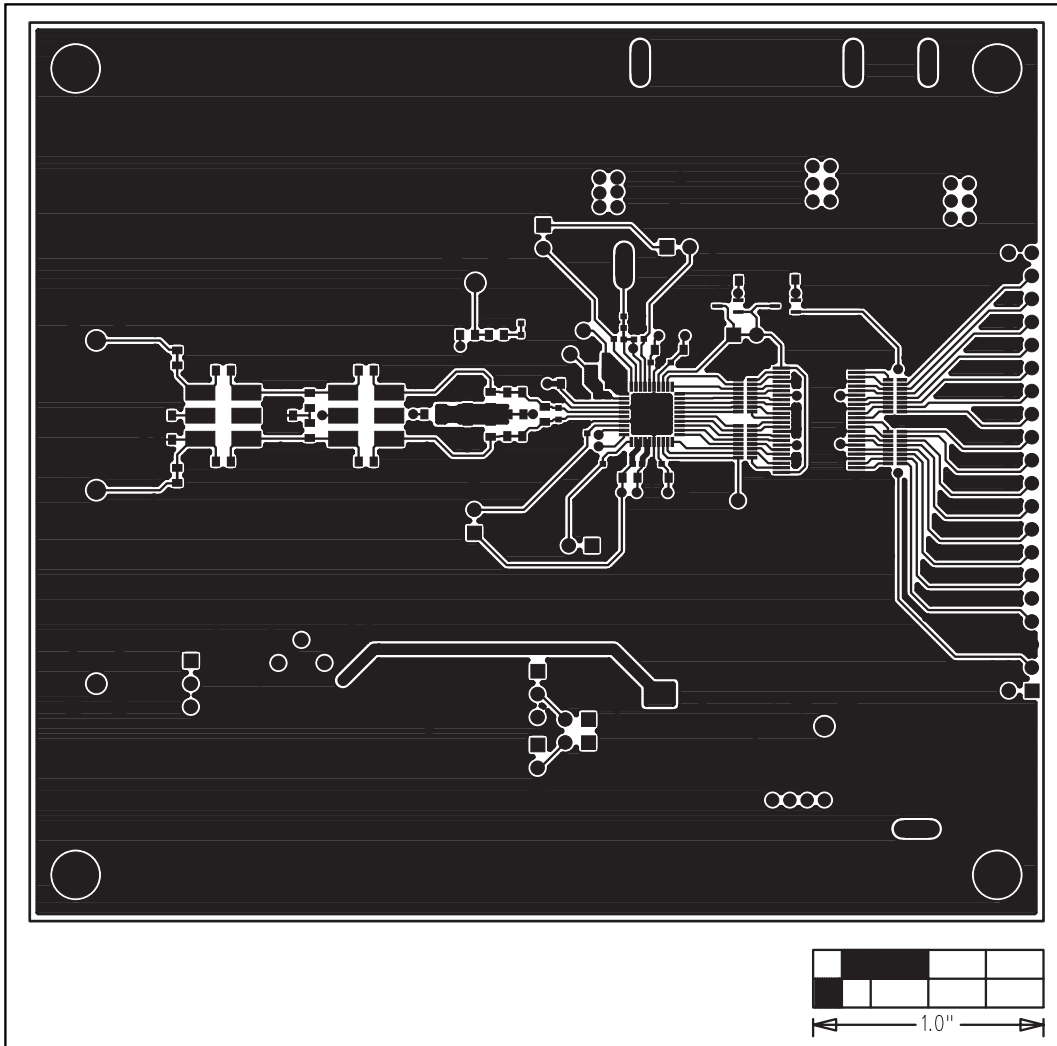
MAX1211 EV Kit PC Board Layout—Component Side
